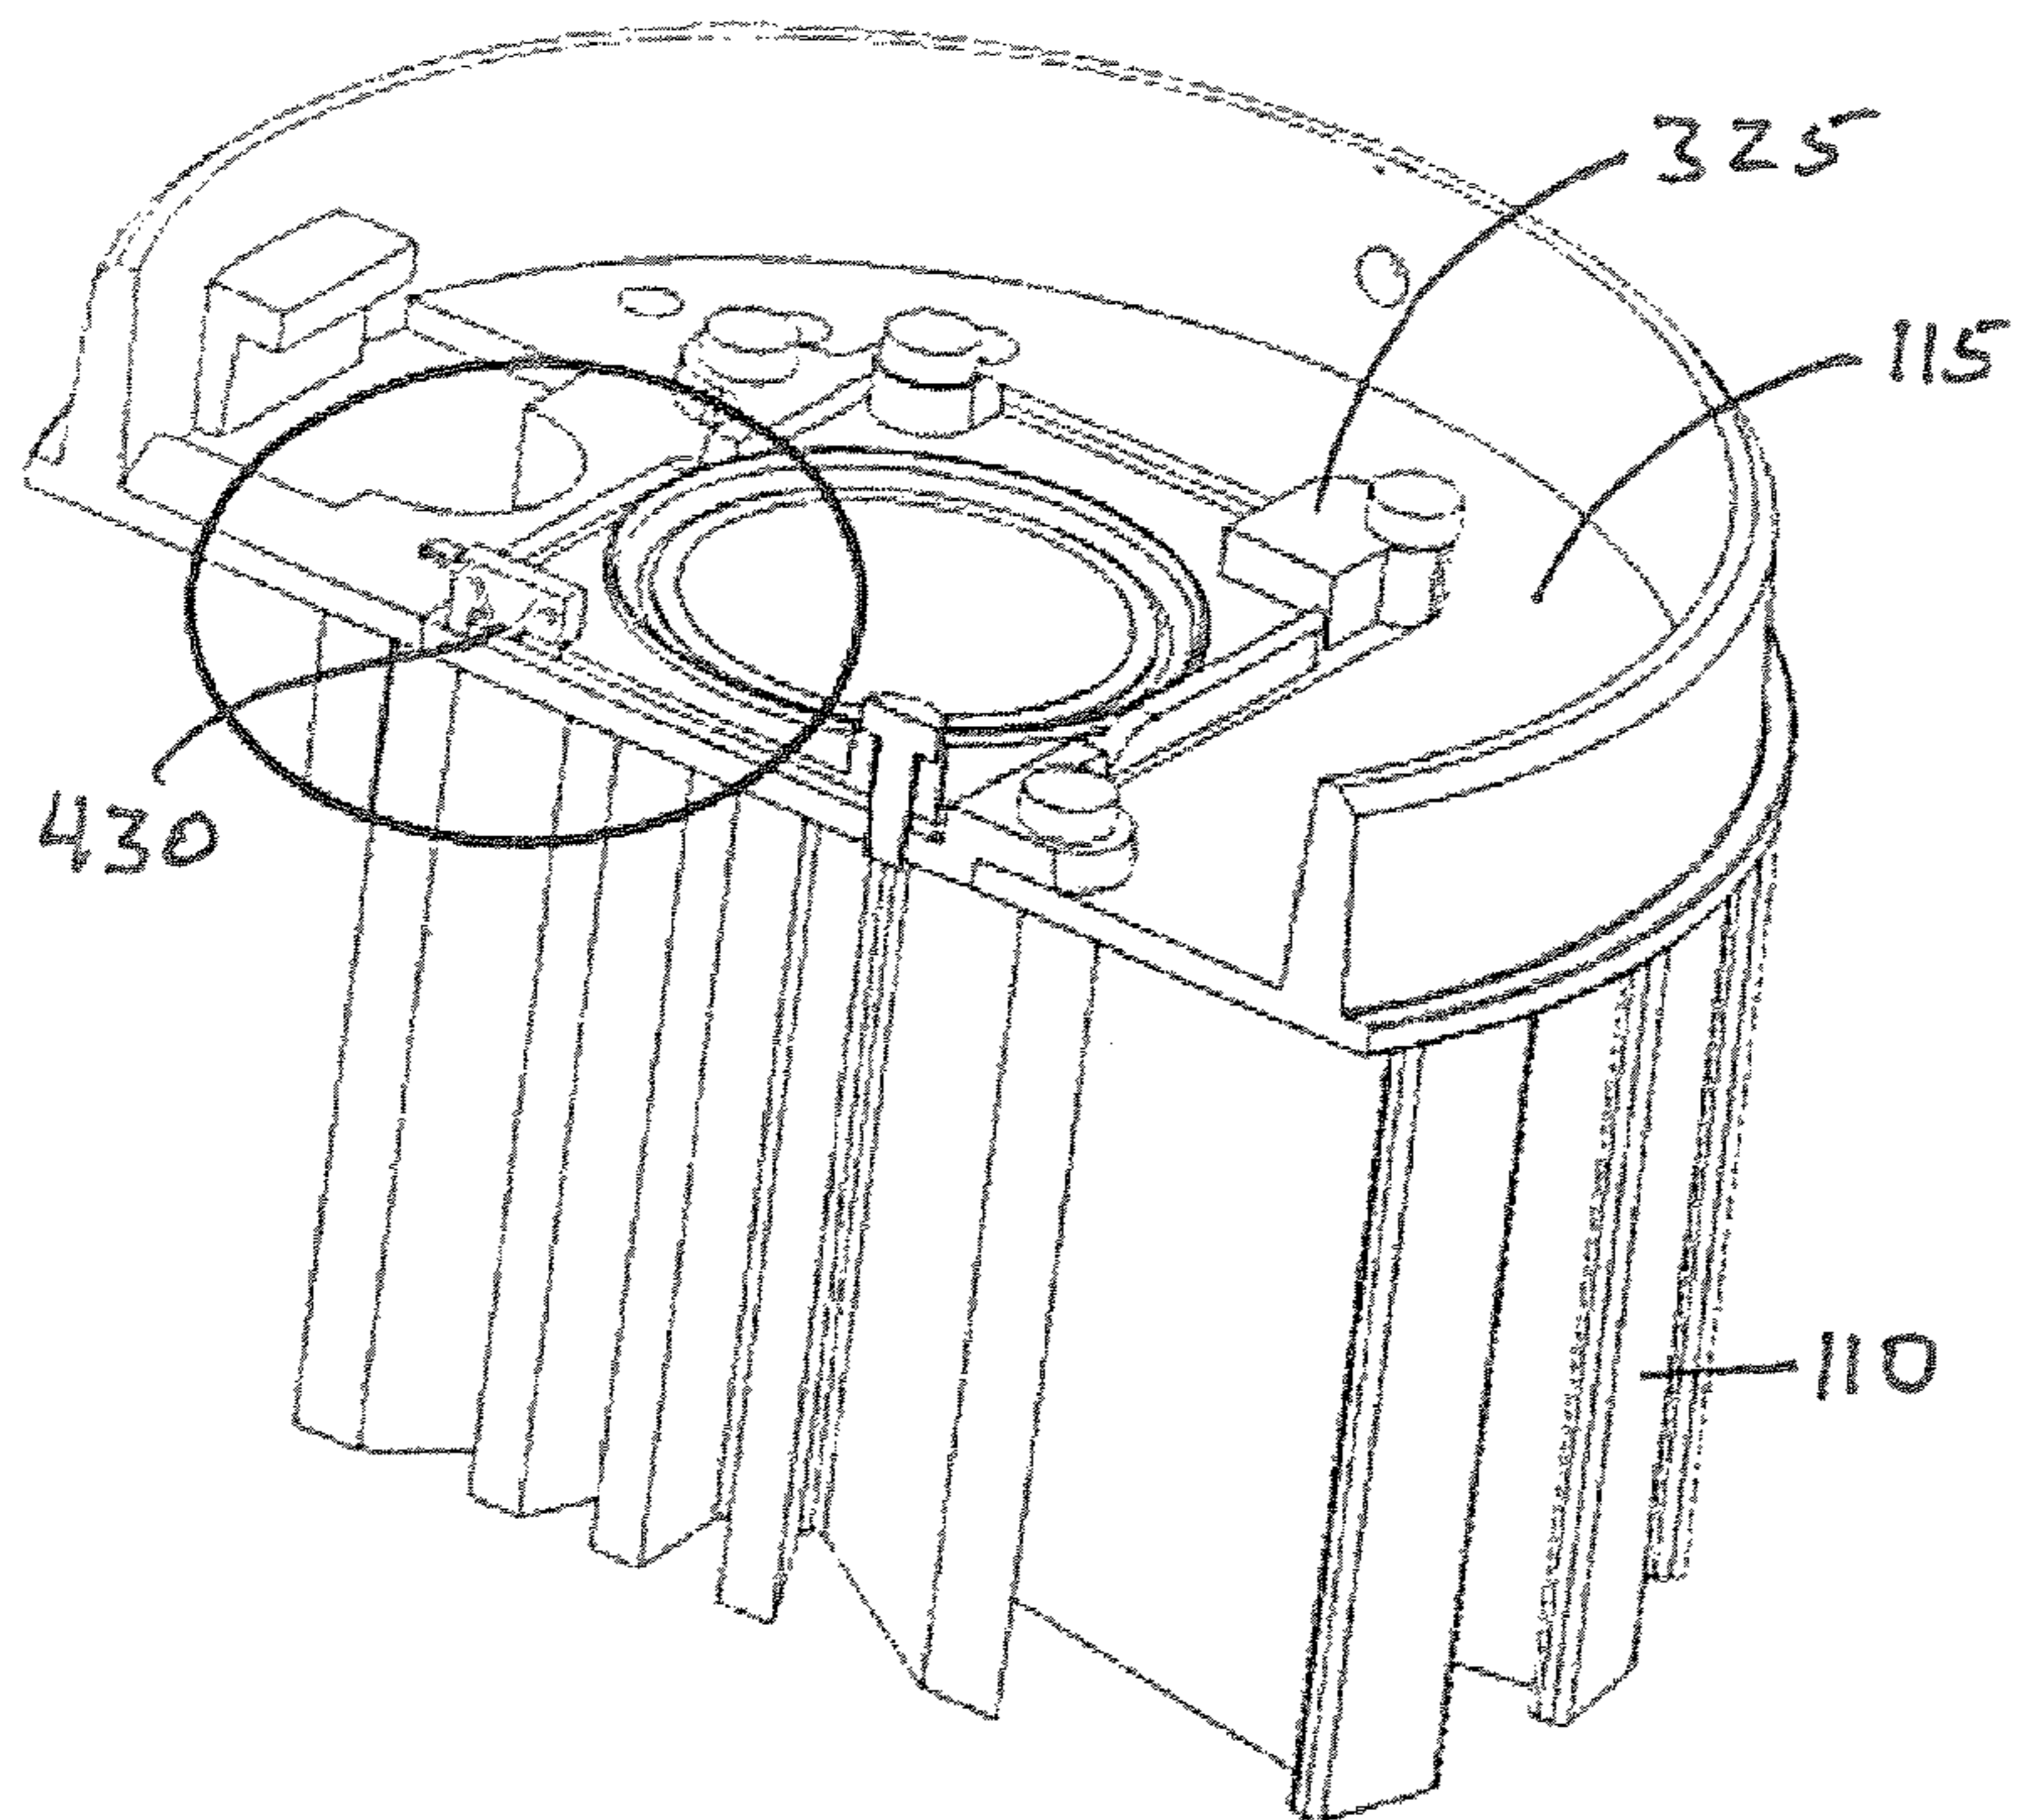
LED Holder, Section View illustrating Typical Contact with Solder Pad
